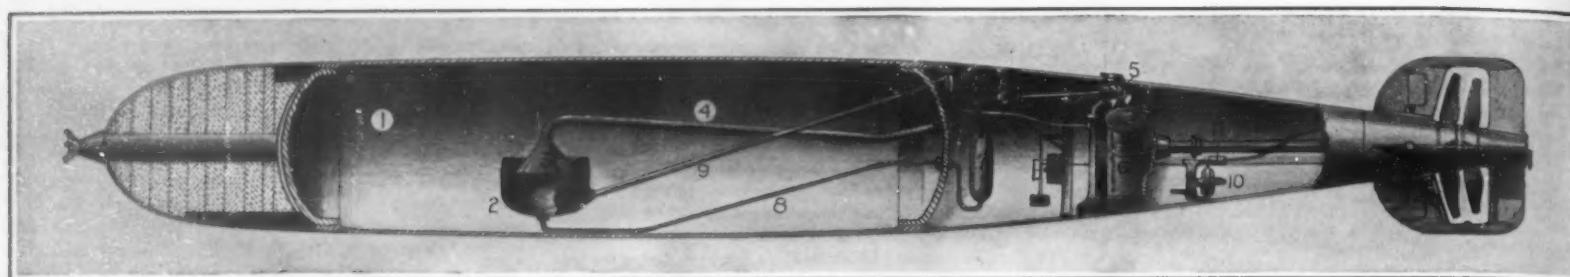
The old style torpedo with internal superheater and Brotherhood engine
